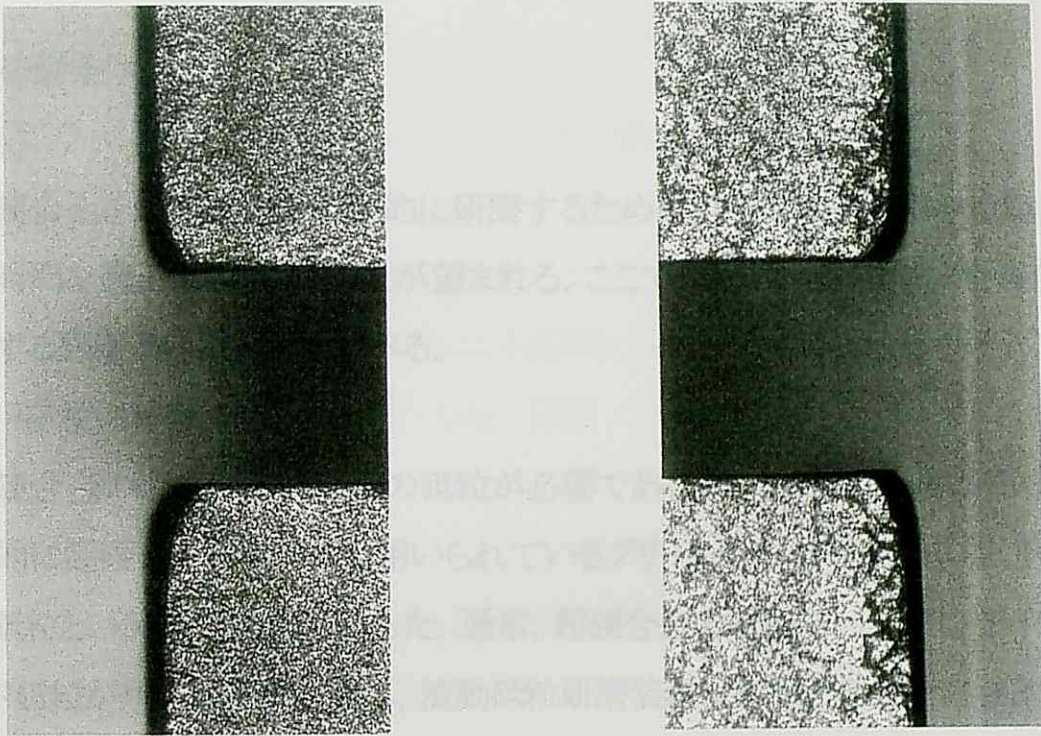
Enlarged view of workpiece after combined polishing by old polishing equipment
